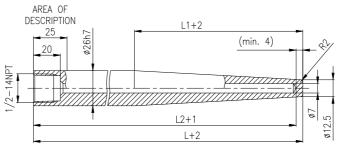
DIMENSIONAL DRAWING, TABLE OF DESIGNS OF THERMOWELLS WITH FLANGE, SHAPE 4 PURSUANT TO DIN 43772
